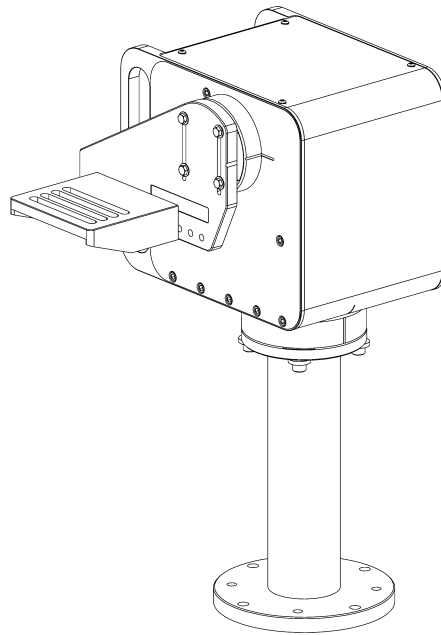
X300 Pan & Tilt Head, Mounted on a PM8 Pedestal Riser (front angled view)
